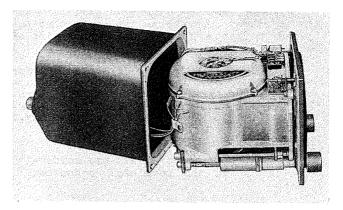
D. Removal of Clamp Holding Three Wires to Frame
